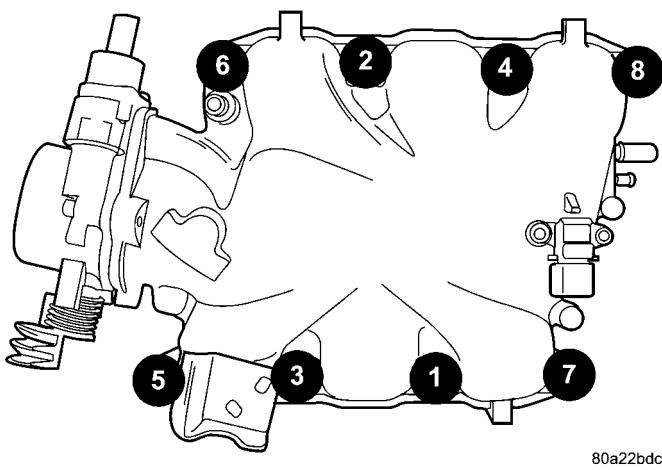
UPPER MANIFOLD TIGHTENING SEQUENCE
